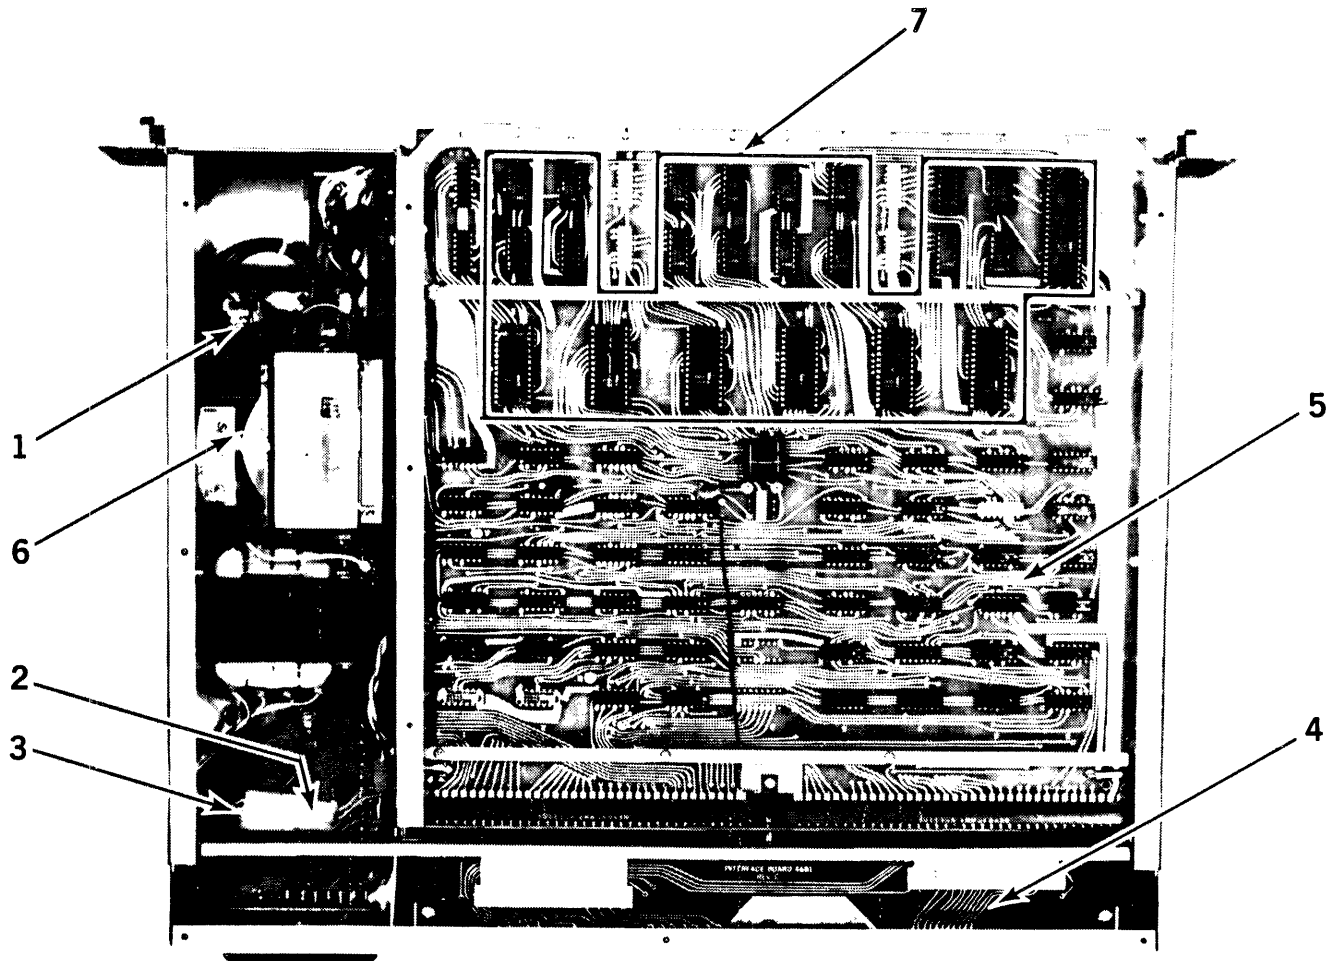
MODEL 9219 FORMATTER TOP VIEW (TOP COVER REMOVED)
